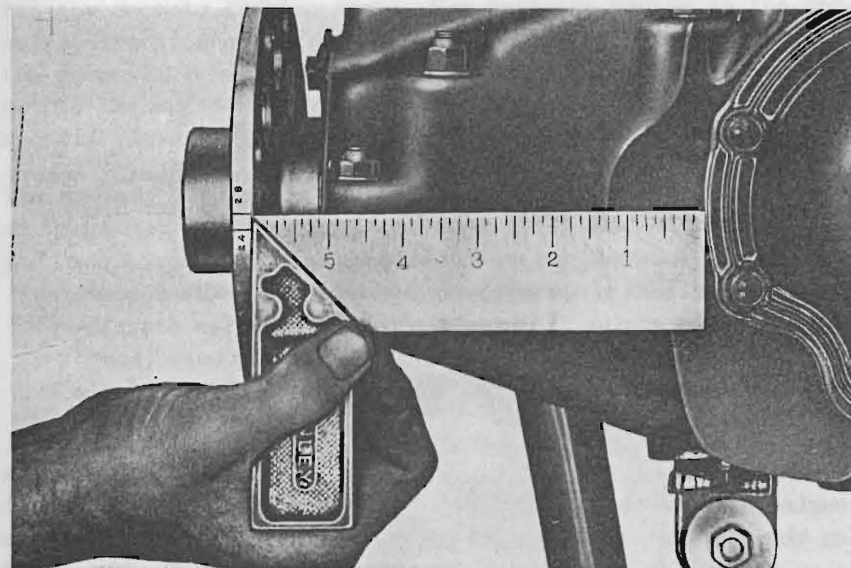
Aligning Crankshaft Flange with Crankcase Centerline
